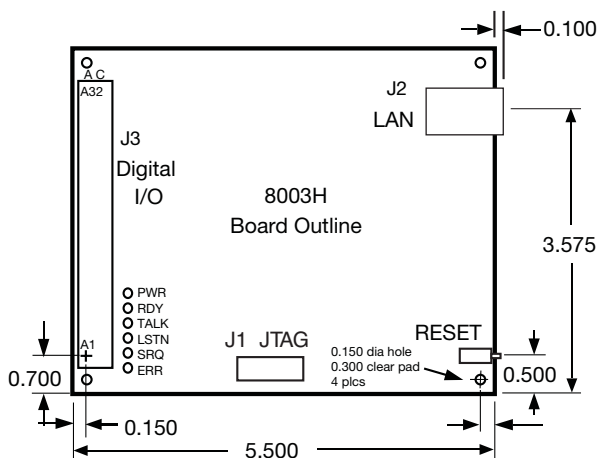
8003H Outline Drawing (Horizontal RJ45)
